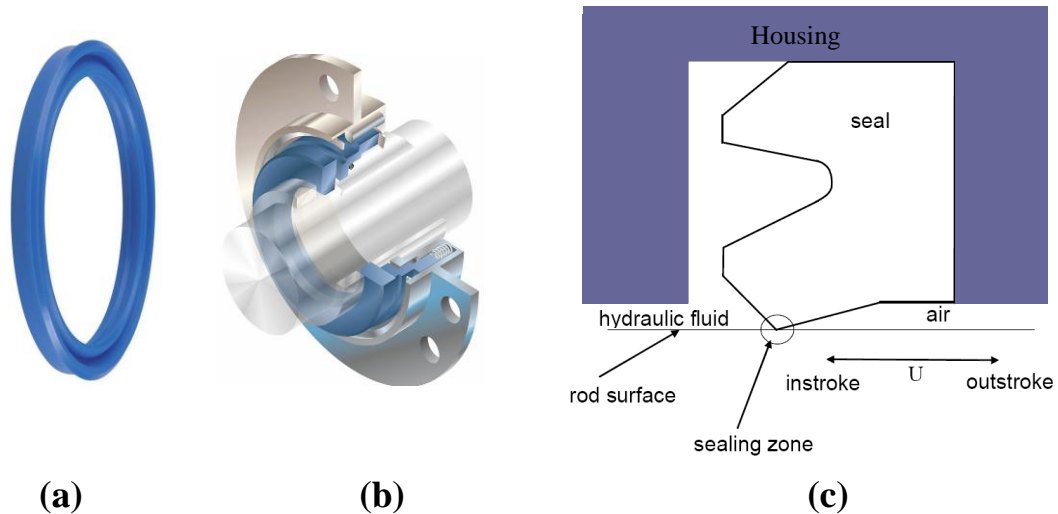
(a) Typical hydraulic rod seal (b) seal mounted between rod and cylinder housing (c) schematic of a mounted seal.
